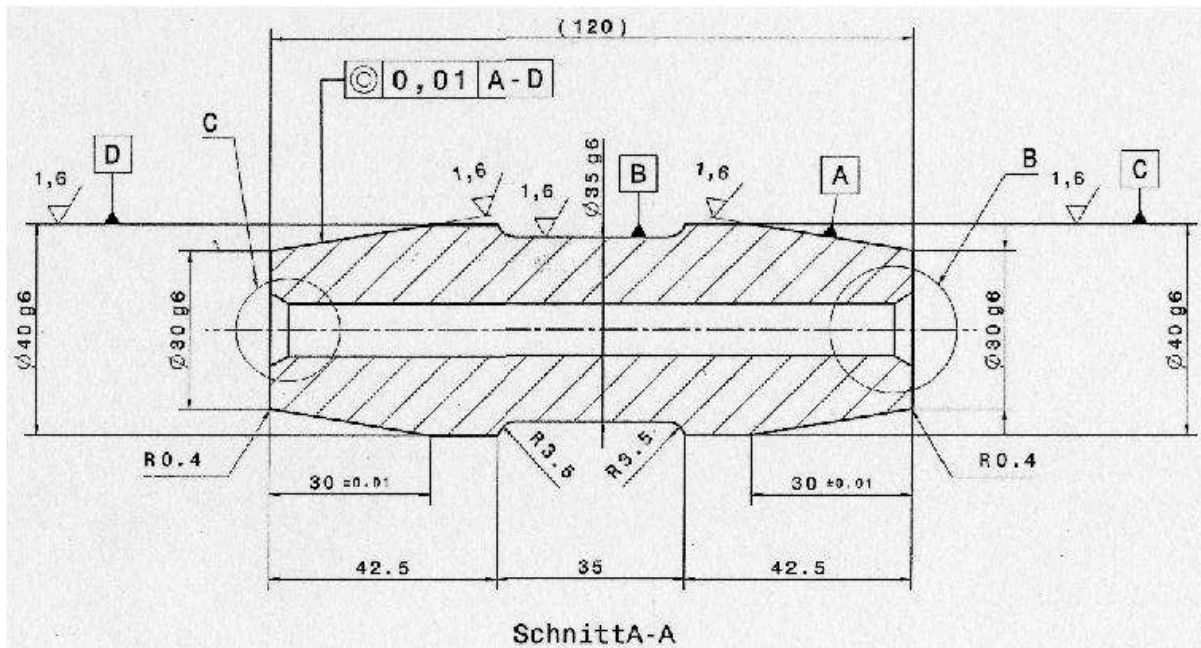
Technical drawing of the inner Nb1Zr cell. The dimensions of the cell are shown. The thinnest part of the cell is in the middle where the neutron beam passes through. The rest part of the cell is mostly assembled in a steel jacket. Sealing surfaces of the high pressure components can be seen as well at both end of the cell.
